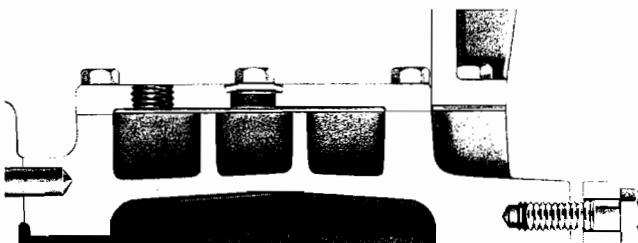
Well Designed Bearing Frame Cooling Jacket.
